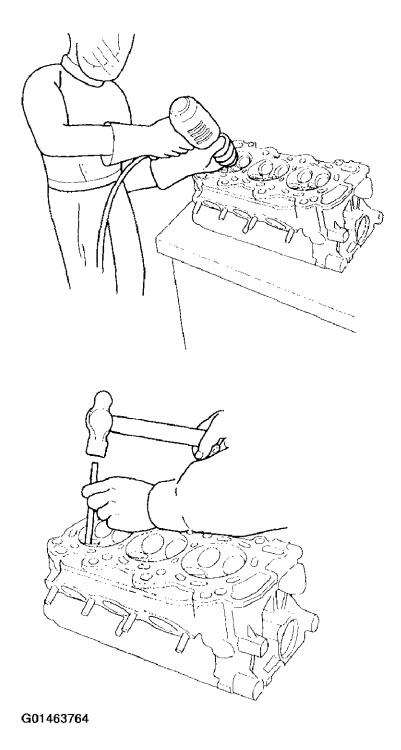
Driving The Guide Courtesy of AMERICAN HONDA MOTOR CO., INC.
